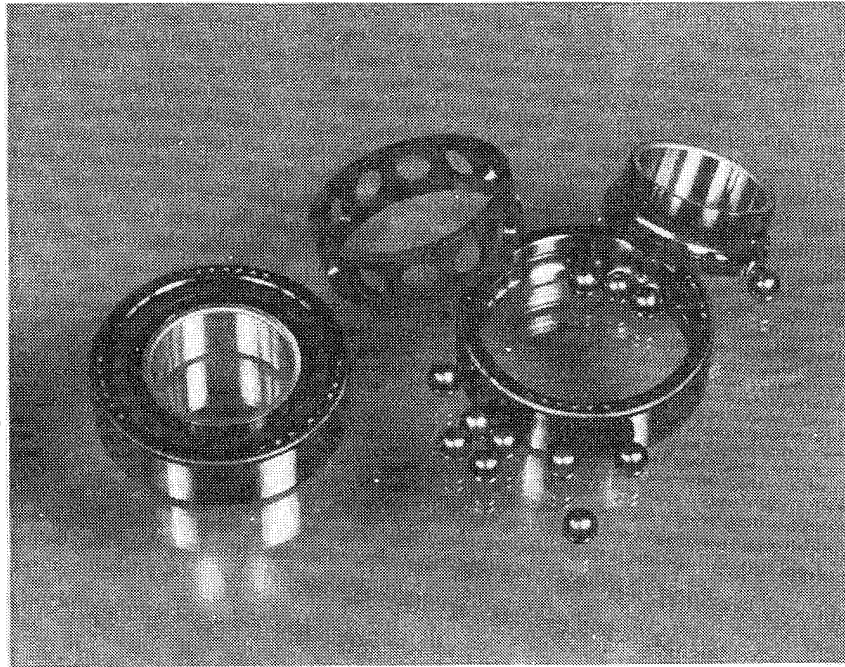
Photo of 105 test bearing with custom retainer.
